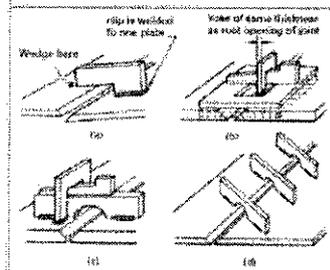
Various strongback arrangements to control distortion during butt-welding.
